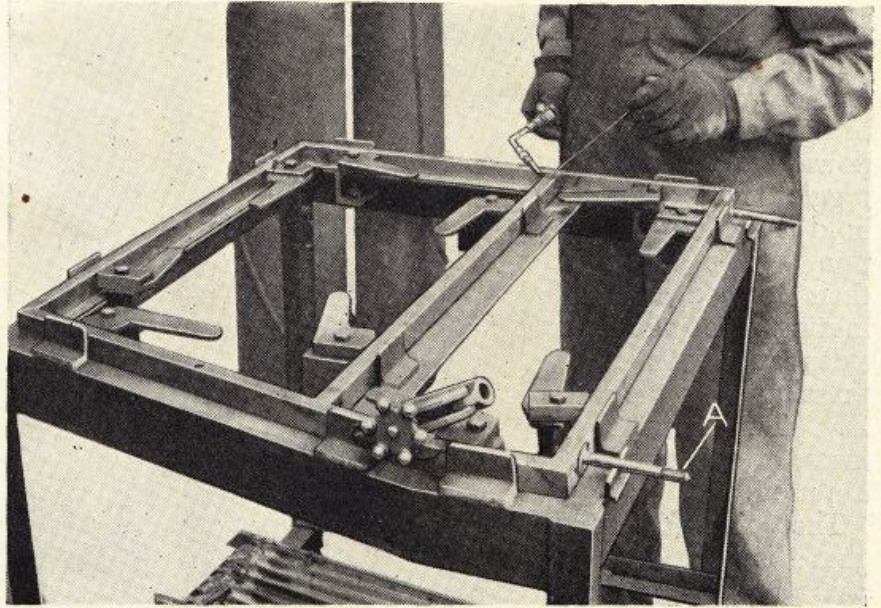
Gas Welding is Employed for Assemblies Built-up from Comparatively Thin Sheet Material. The Illustration shows a Typical Assembly Jig with Cam Type Clamping Levers
